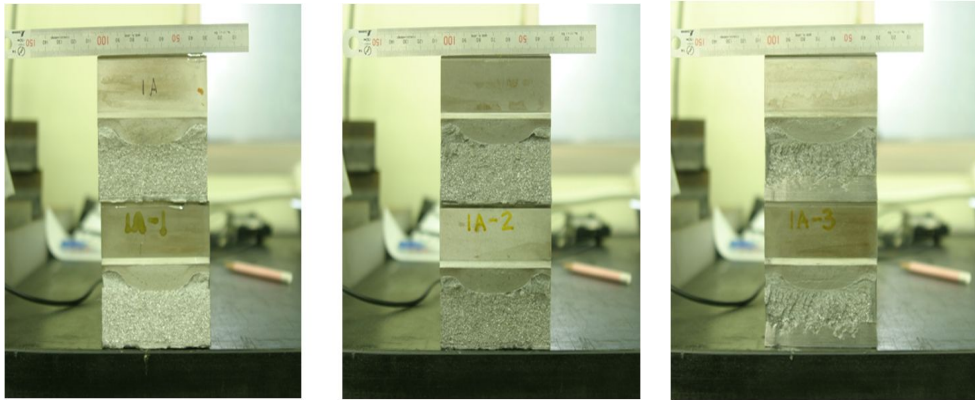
Fractured EGW welded specimen with surface notch
